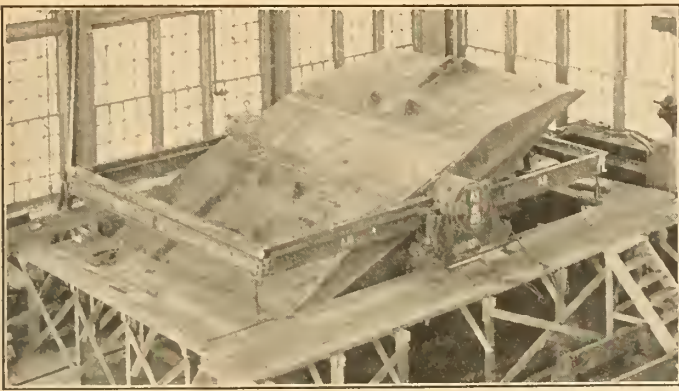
Butterfly Valve—Size 15 ft. 6 ins. by 21 ft. 10 ins. Assembled in Shop with Frame and Bearings.
